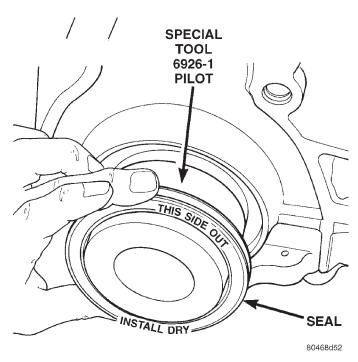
Rear Crankshaft Seal and Special Tool 6926-1
